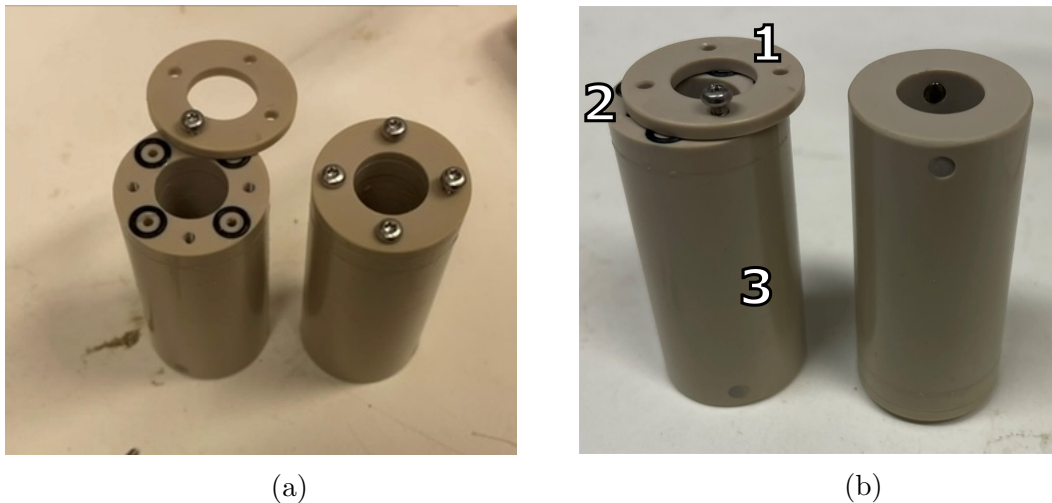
(a) Top of machined float (b) side, top and bottom of machined float. Holes inside of O-rings for filling with water to add mass is seen in (a). Magnets can be seen on the bottom in (b).
